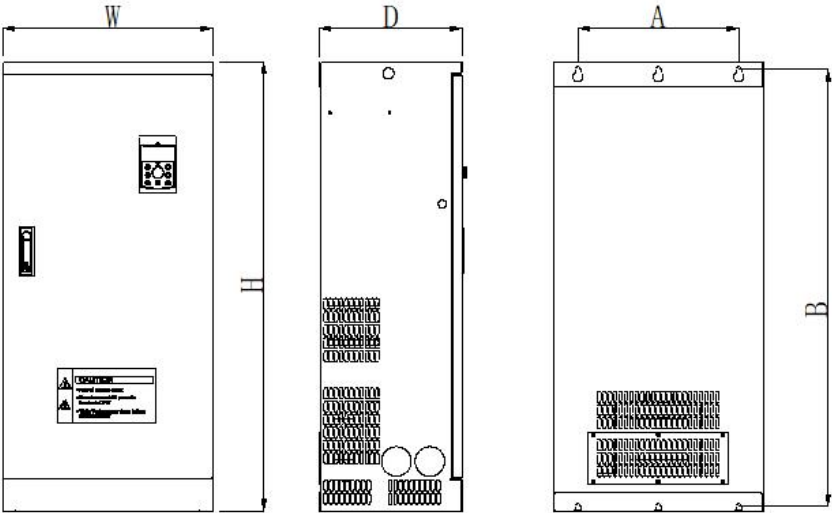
Schematic diagram of external dimensions and installation dimensions of 380V (4T) 160-450kW VFD
